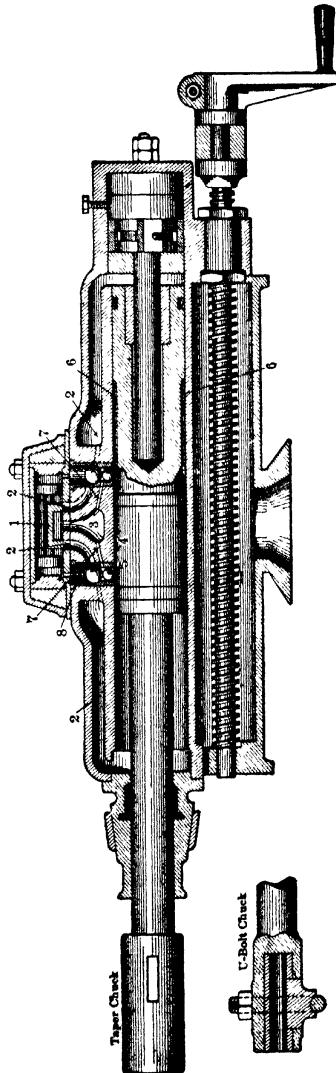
Holman Spool-Valve Drill (Camborne, Cornwall, England).
